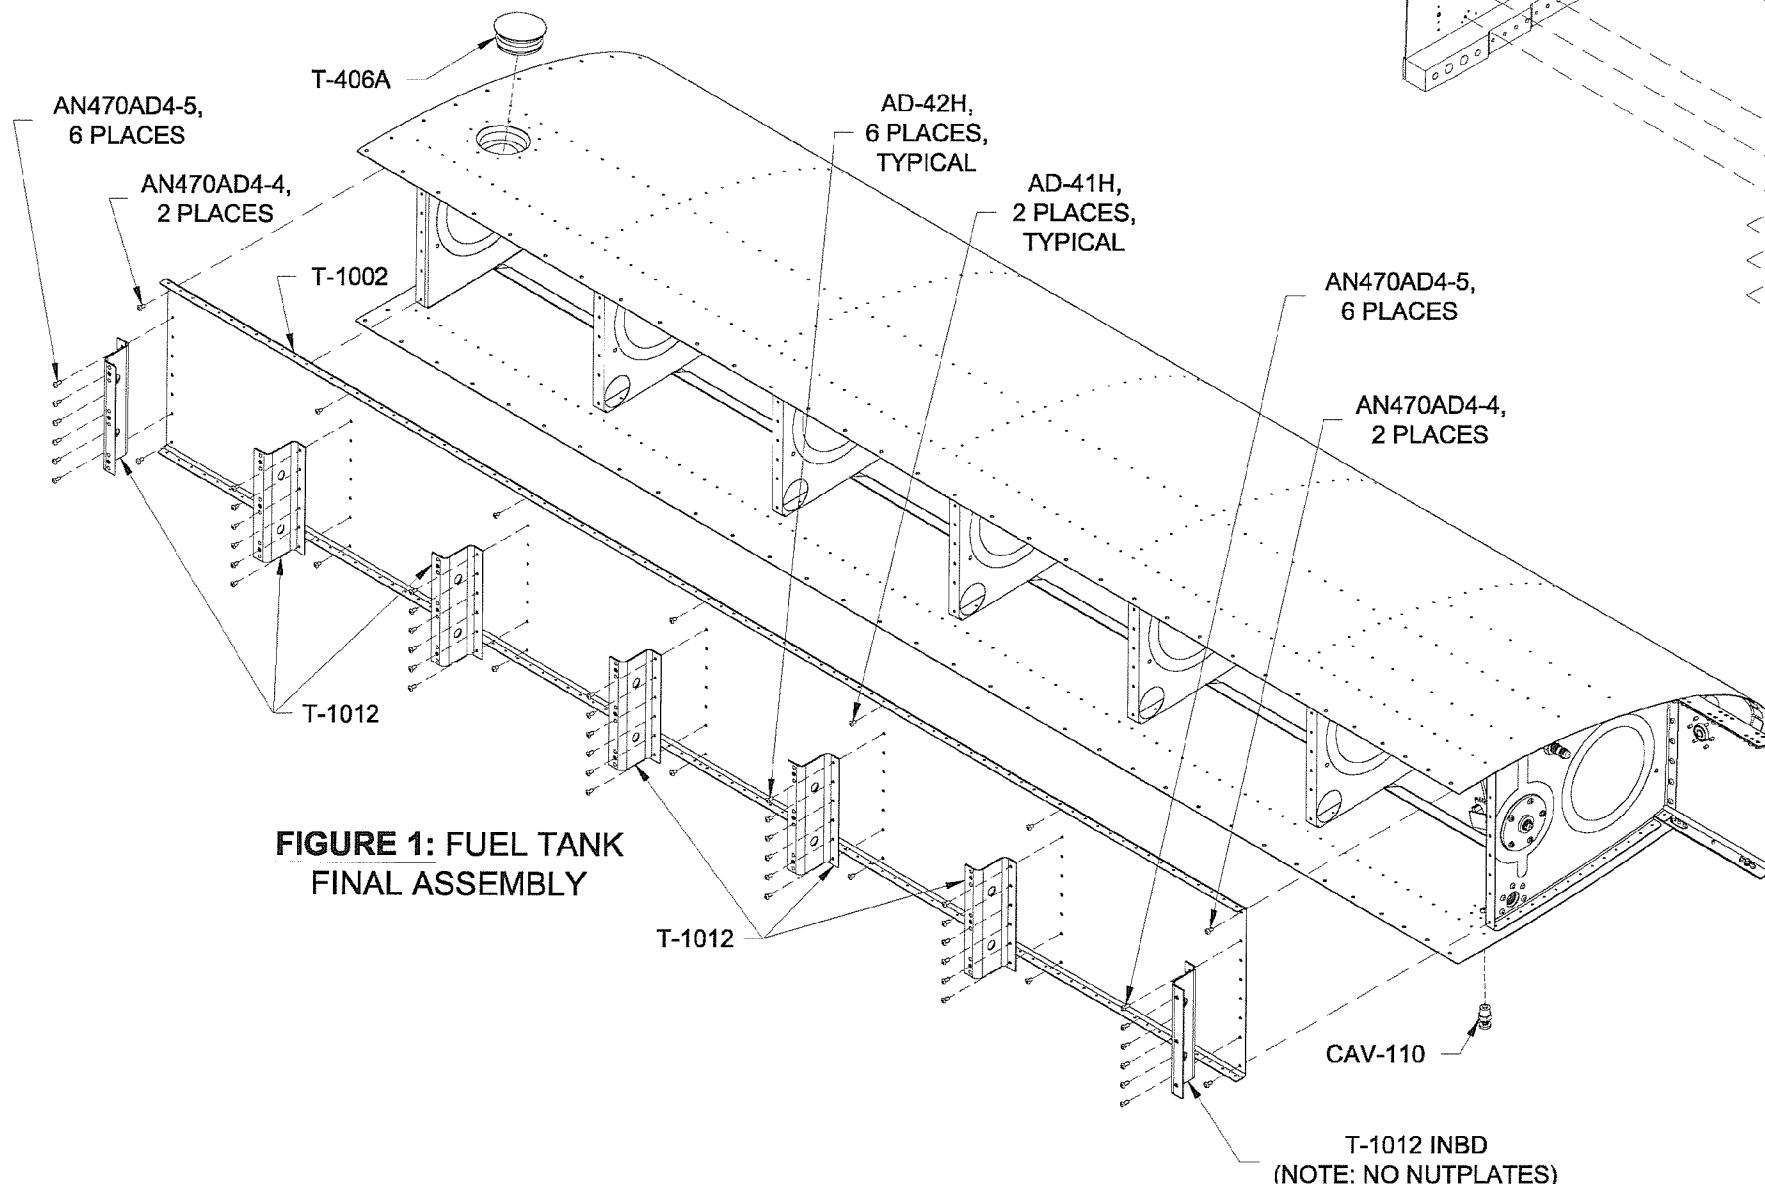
FUEL TANK FINAL ASSEMBLY
